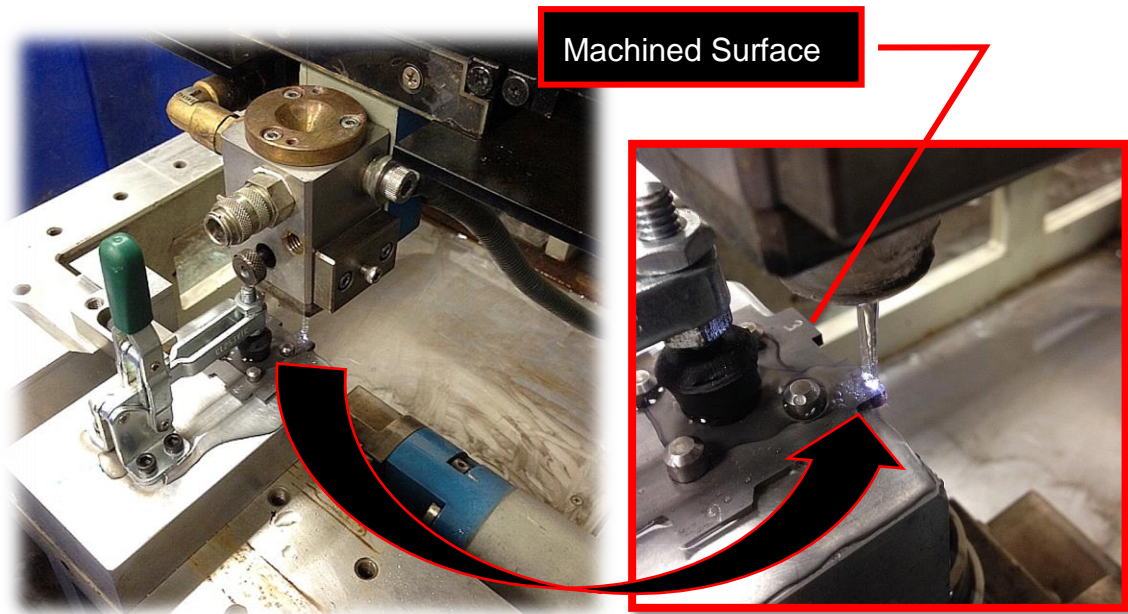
Millimeter size bend testing sample preparation using wire EDM and a custom fixture with four precisely located dowel pins. The sides of the flat sheet of porous tungsten was dry or cryogenically machined with different machining parameters on each tab prior to cutting off a 0.4 mm thin sample for bend testing.
